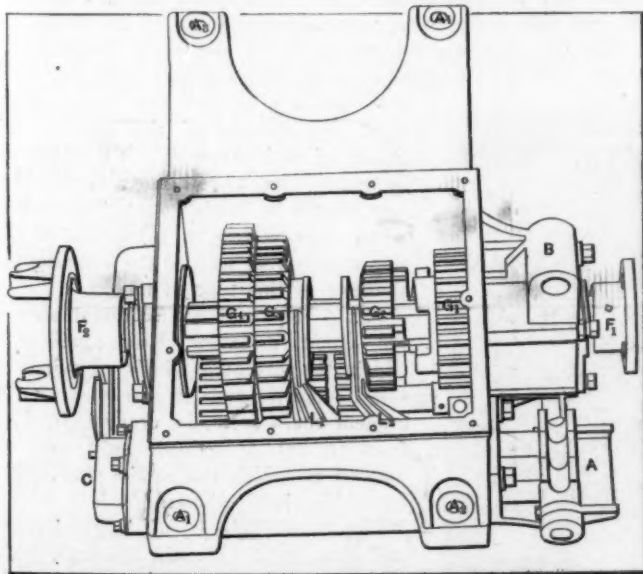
Plan view of the gear box of the 50-horsepower Kissel Kar, showing the relation of the several members
